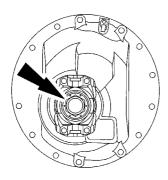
Dana Model S110 Wheel Differential Assembly, Disassembled View
